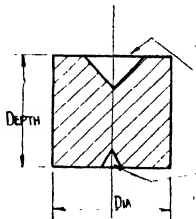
ROUGH CENTRED PELLET WITH INLET AND OUTLET CONE
